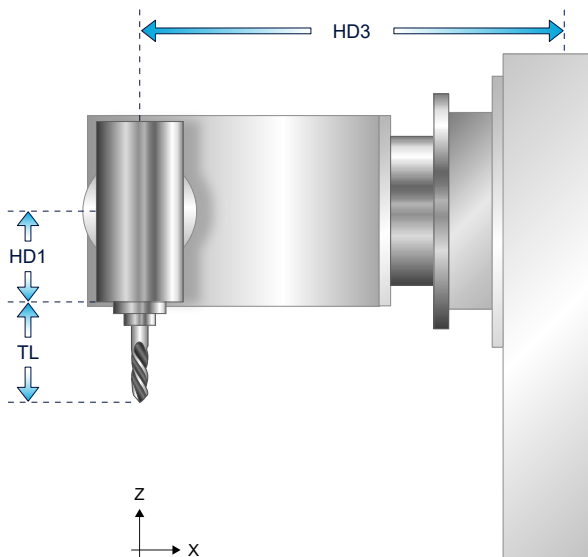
Sizes L, TX, HD1, HD2 and HD3 of the rotary/swivel head
